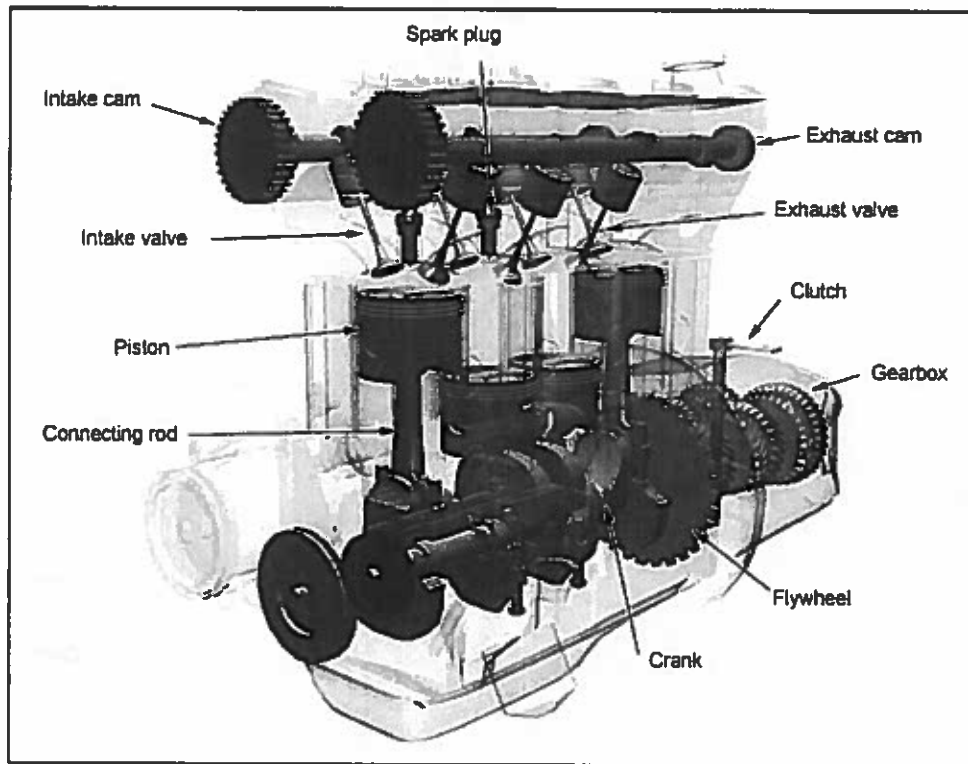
Typical Four Cylinder Internal Combustion Engine.
